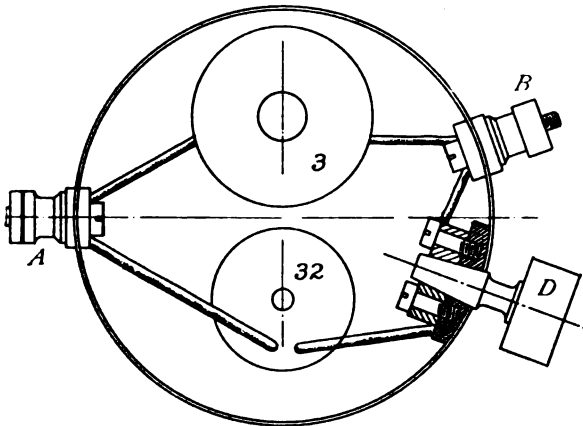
FRONT VIEW OF AMPEREMETER WITH DIAL REMOVED SHOWING CONNECTION OF RESISTANCE COIL.
